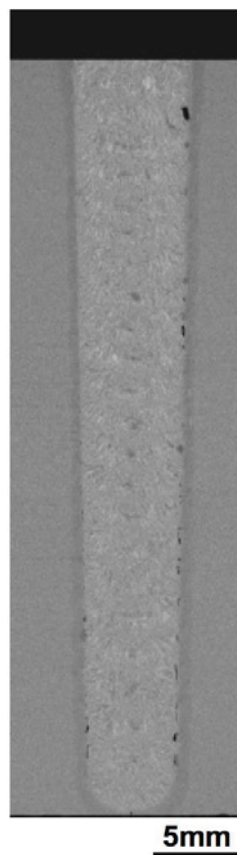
Cross sectional weld produced by hot wire laser welding using laser scanning method.
